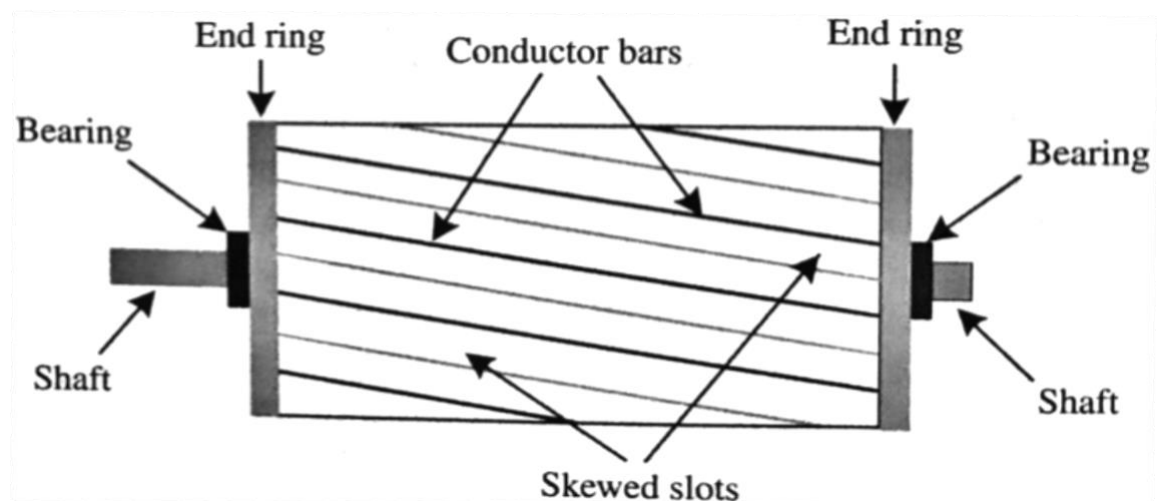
Structure of a squirrel cage rotor for an AC induction machine.¹³⁸
